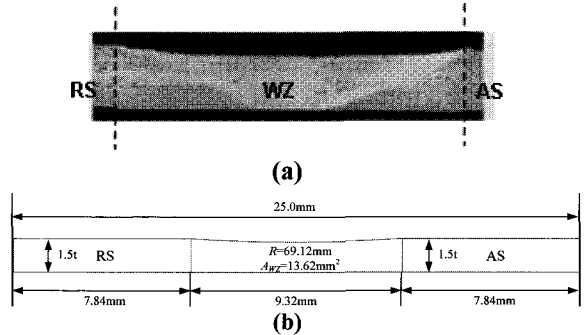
(a) Micro-photo and (b) dimension of the friction stir welded cross-section
